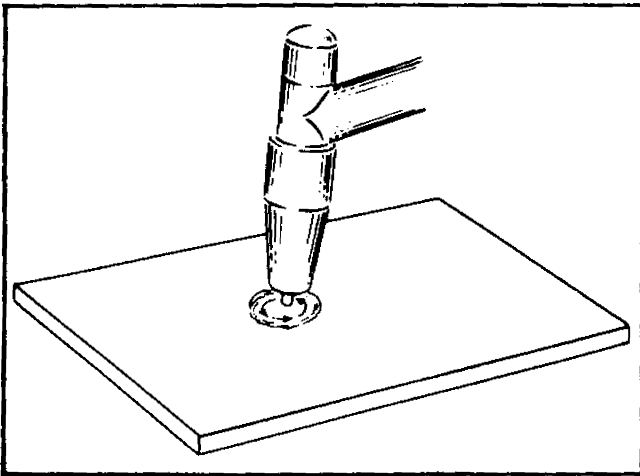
Forming a Molten Puddle with a HELIARC Torch
